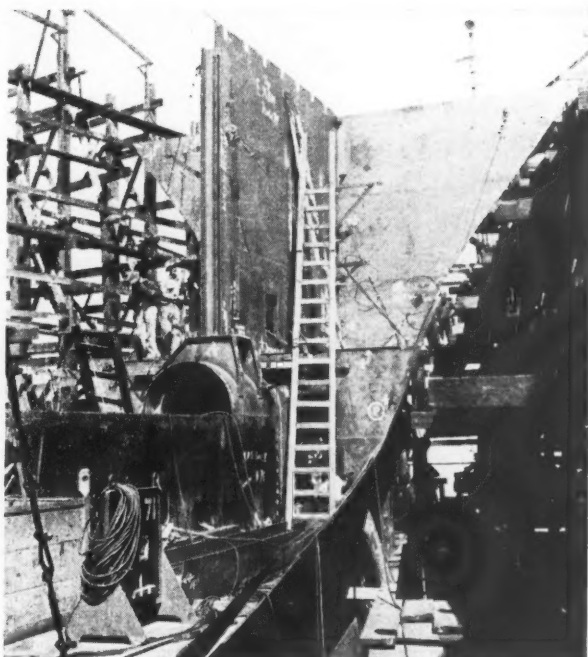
With the Aid of Two Gantry Cranes, a Pre - Fabricated Forepeak is Swung into Position in a Part-Completed Ship
